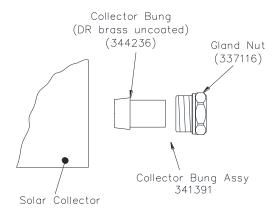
DETAIL C - COLLECTOR UNION ASSEMBLY - CONETITE FITTING
